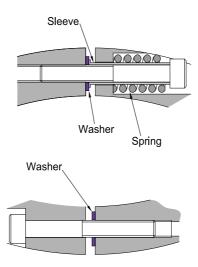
Rope Guide Inner Band Spring and Sleeve Arrangement
